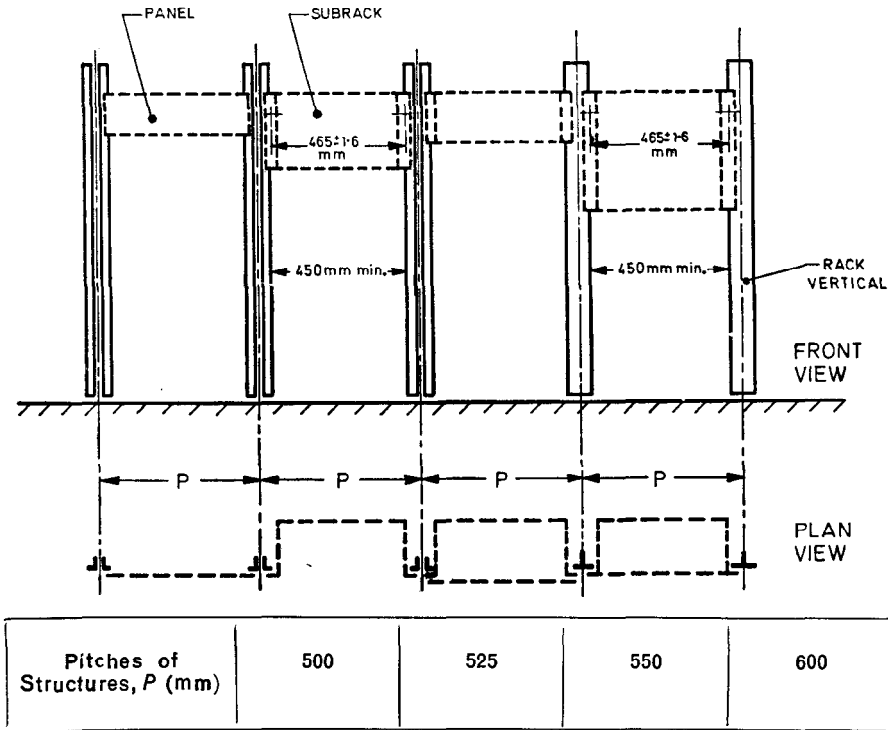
PITCHES OF FIXED RACK STRUCTURES
